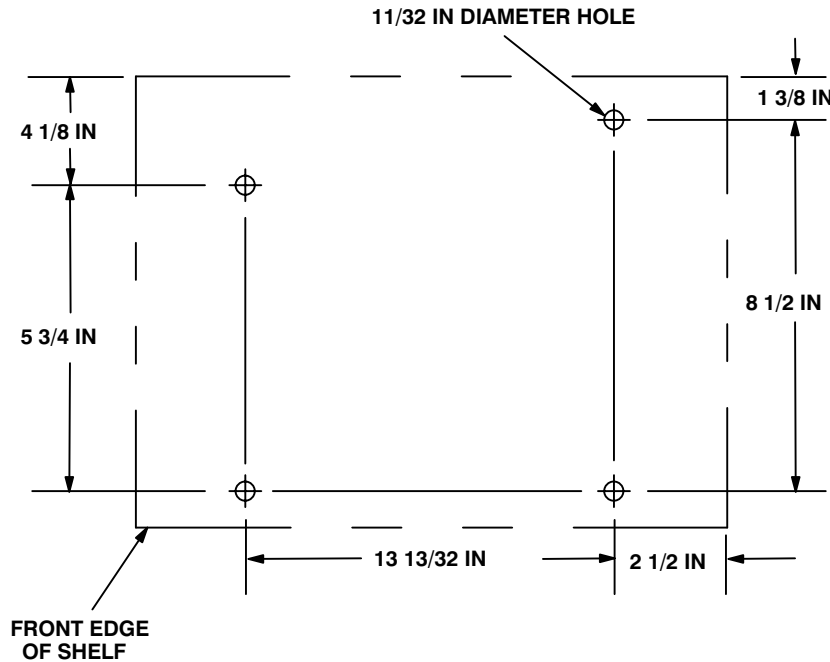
(1). Mounting Base Installation: Drilling Dimensions
